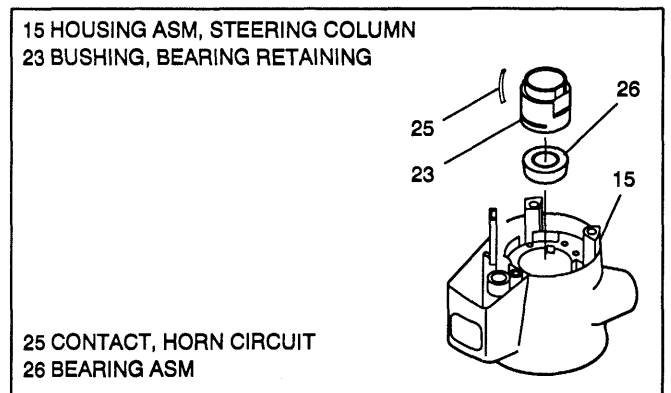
Removing Bearing Retaining Bushing and Bearing Assembly
